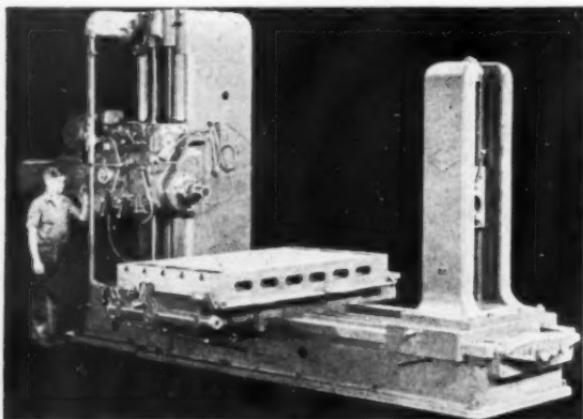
A standard horizontal boring, milling and drilling machine. The bed, column, head and outboard support are all standard units, made of standard parts. The table is one of a series of standard sizes that can be fitted to the machine to meet the customers' requirements.
